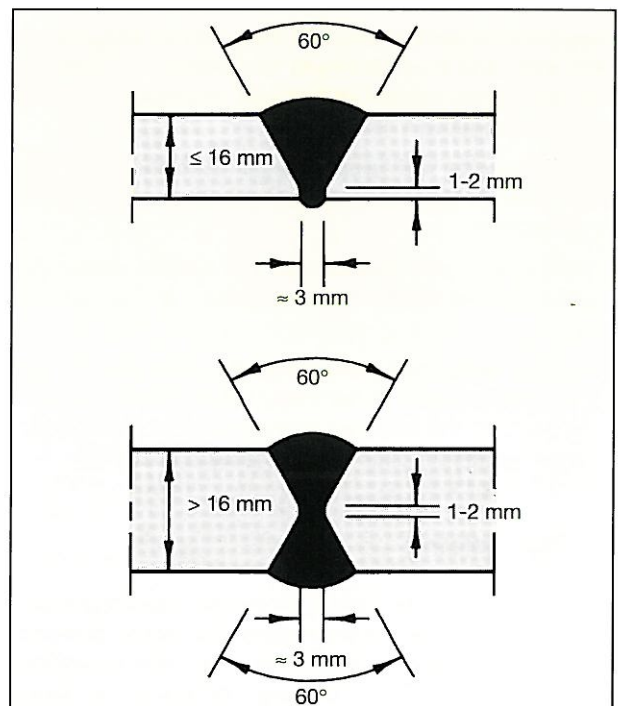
Typical detail for welds performed in horizontal position of the pile
